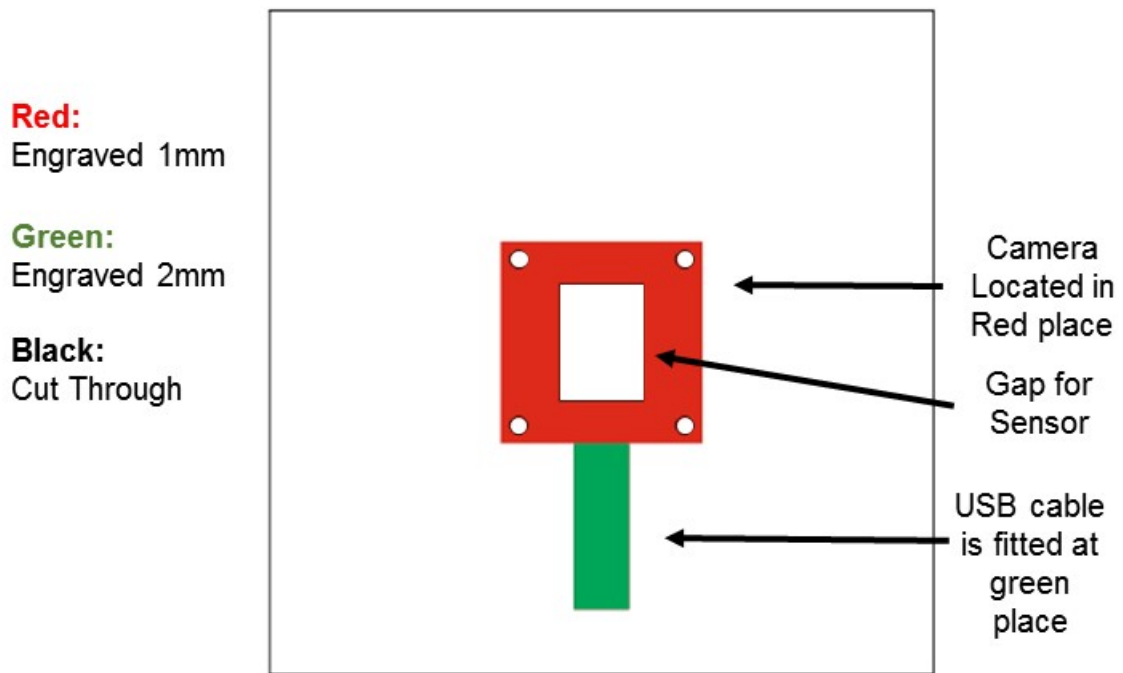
CAD design for image sensor stand. Colored parts are engraved on 3mm PMMA. Black lines are cut trough.
